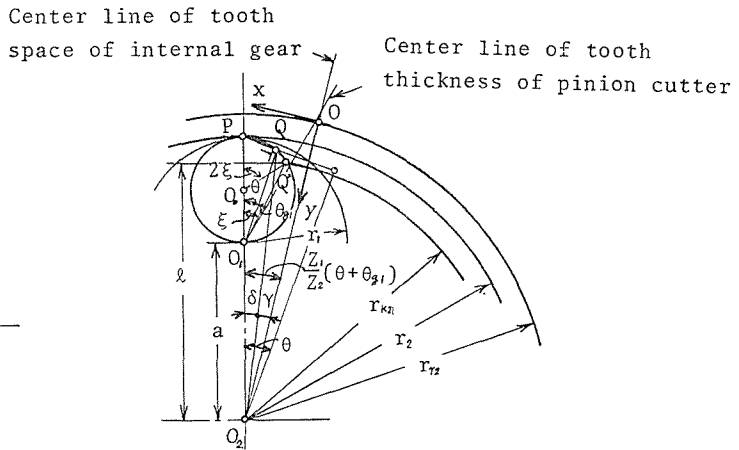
Tooth profile of internal gear generated by radial flank of pinion cutter
